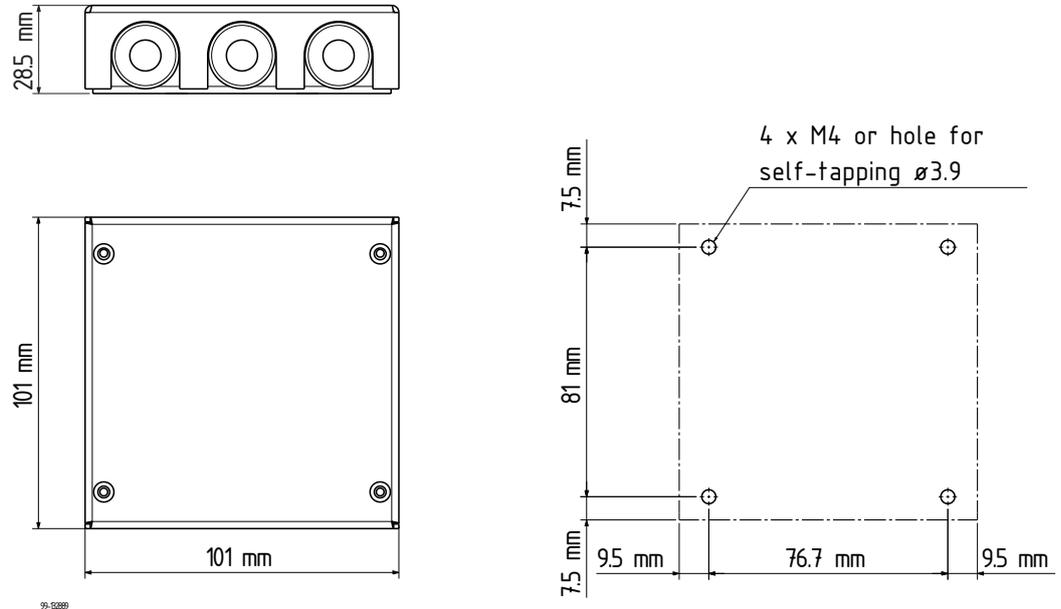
SAILOR 6209 Accessory Connection Box, mounting
